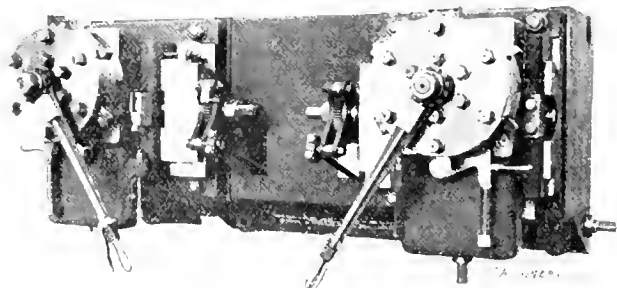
Top View of Tool Bench, showing the Two Tool Turrets and the Slides on which they are mounted.
